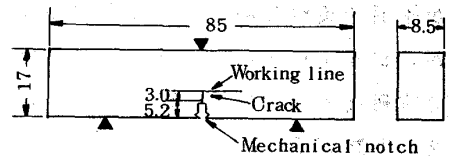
Example of test piece form for fatigue testing (▲: load point)
